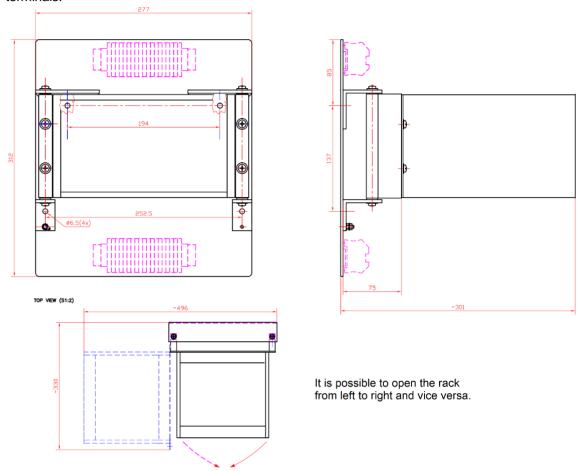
Dimensions for wall mounting of 42 HP devices (upper and lower terminals)
